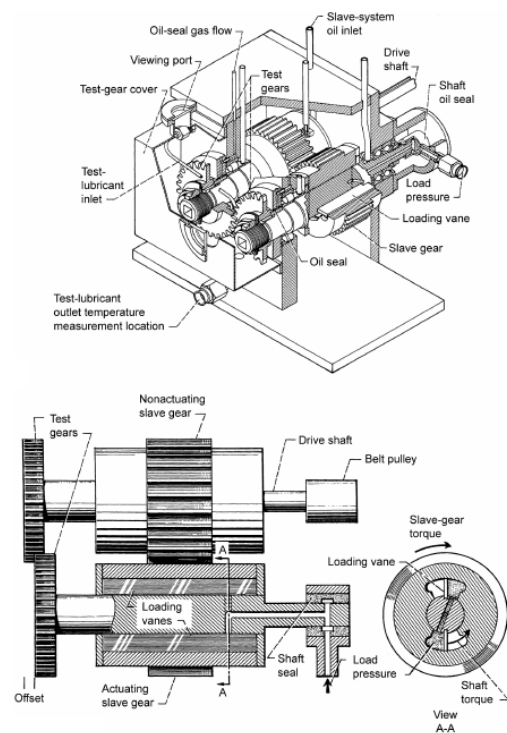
Inline Vane Motor Power-Recirculating Gear Test Rig [98]
